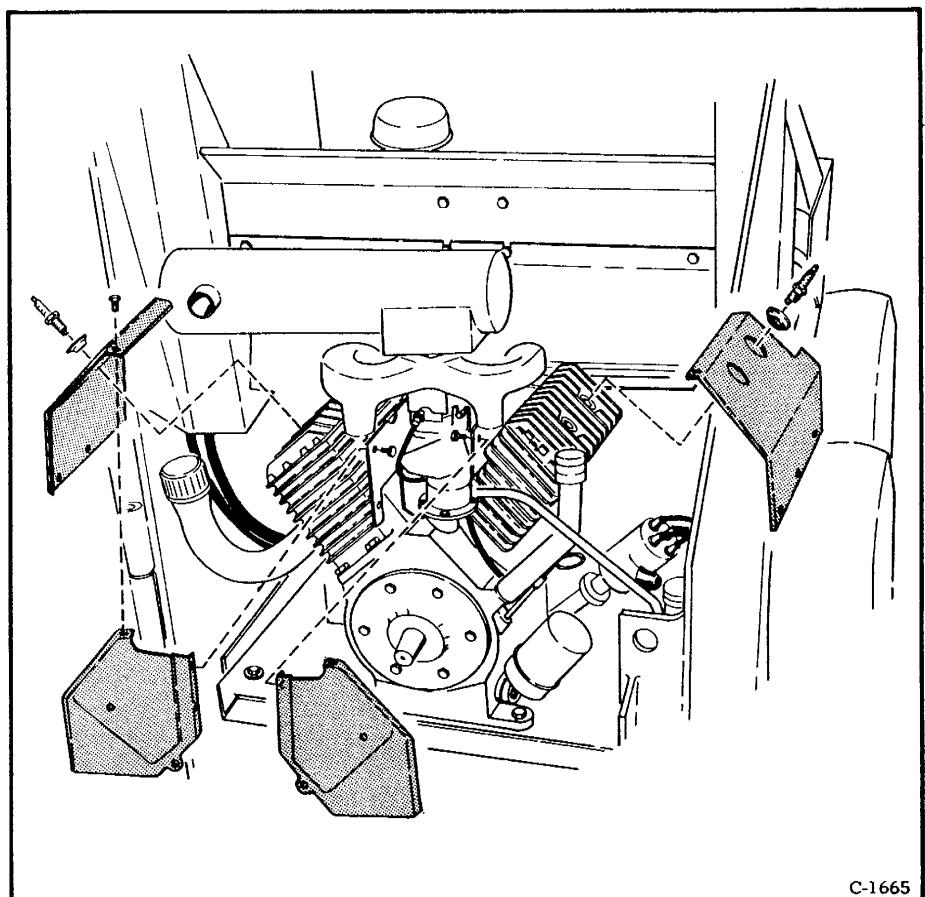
Removal of Cylinder Head Covers & Shrouding
